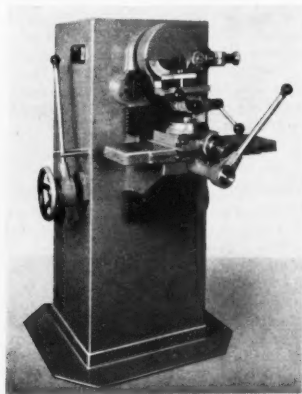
Kraumendahl Spanex machine for grinding chip breaker grooves
